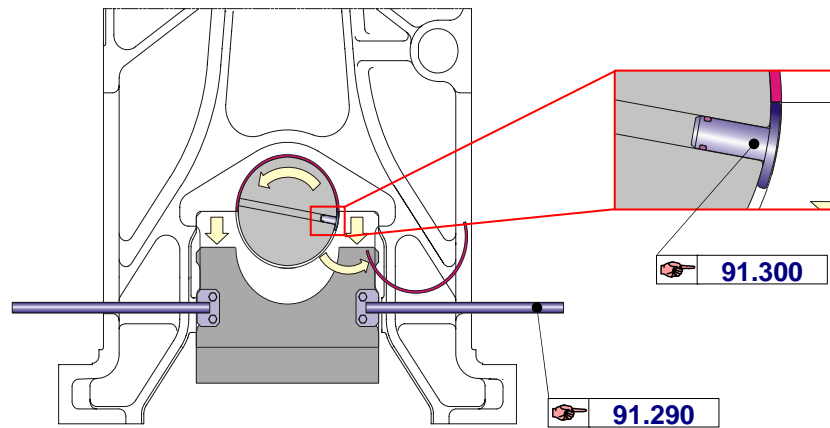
Lower the bearing cap and mount the fitting plug (베어링 캡의 안착 및 피팅 플러그의 설치)
